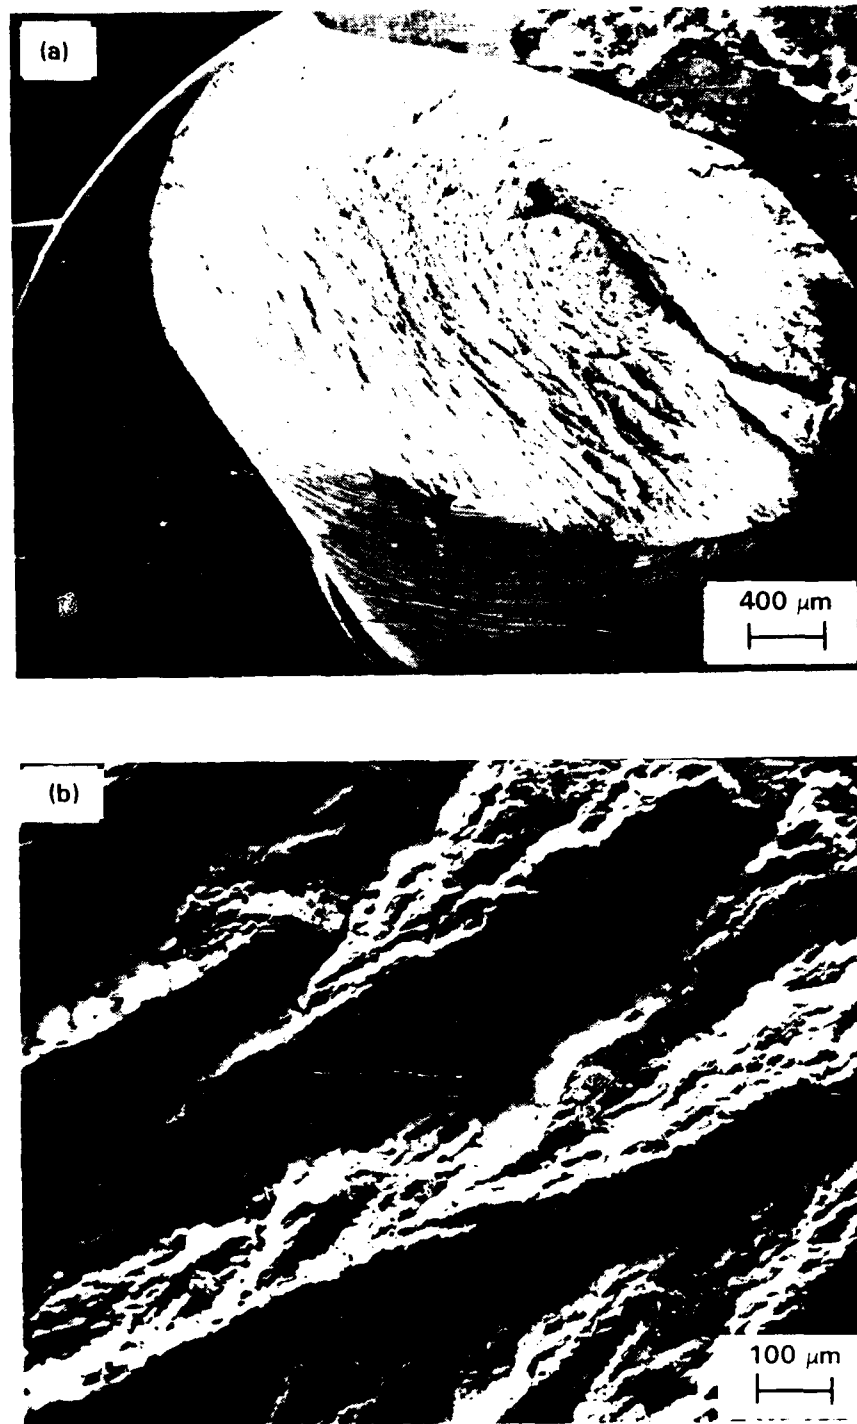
SCANNING ELECTRON MICROGRAPHS OF FRACTURE SURFACE OF THE LONGITUDINAL TENSILE SAMPLE SHOWING: (a) SHEAR-TYPE FRACTURE, AND (b) HIGH MAGNIFICATION SHOWING LARGE SECONDARY CRACKS OR LEDGES PARALLEL TO THE EXTRUSION DIRECTION.
